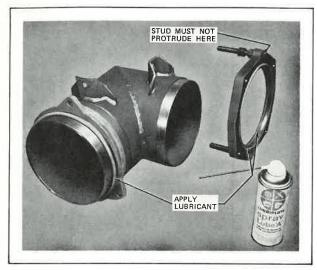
ELBOW PARTIALLY PREASSEMBLED.
